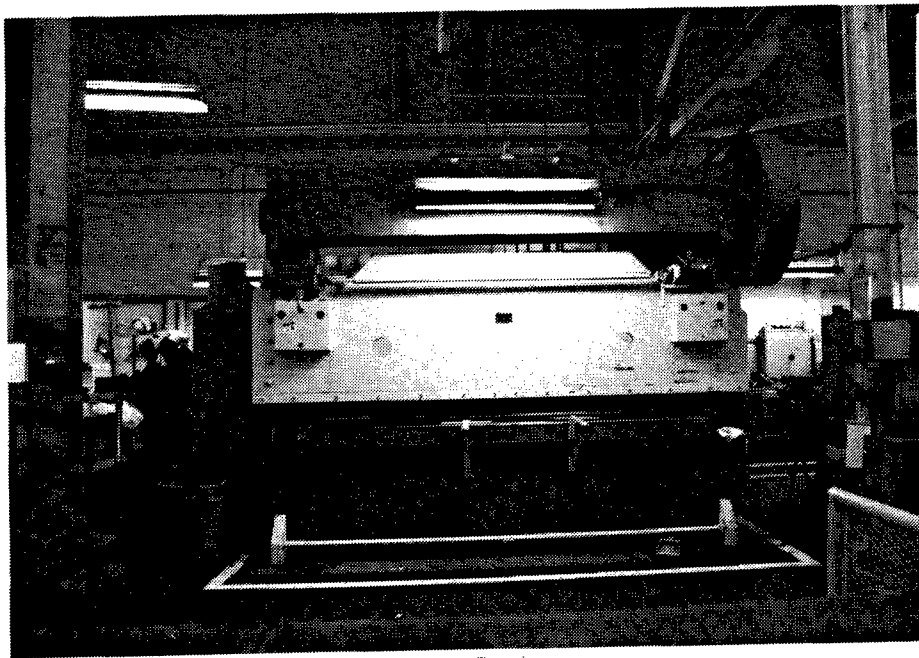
Building 500: A sheet metal press manufactured by Columbia Machinery and Engineering of Hamilton, Ohio, located in the Mill Right Shop.
